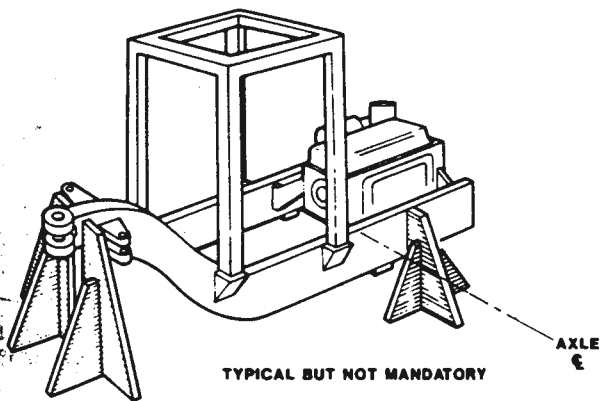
TEST BED ANCHORAGE OF HALF AN ARTICULATED FRAME
